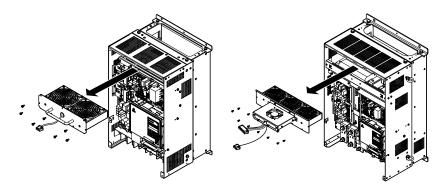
Remove the Fan Unit: 2A0169 to 2A0415, 4A0139 to 4A0362, and 5A0062 to 5A0242
